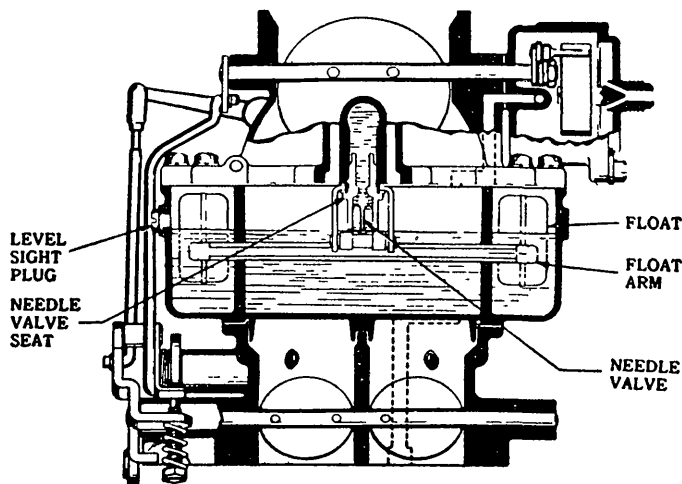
D After checking fuel level as outlined in text, assemble pump rod and choke rod. Adjust choke rod according to specifications given in Stromberg Adjustment table
